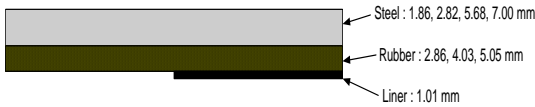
Sectional View of Steel/Rubber Adhesive Test Block
